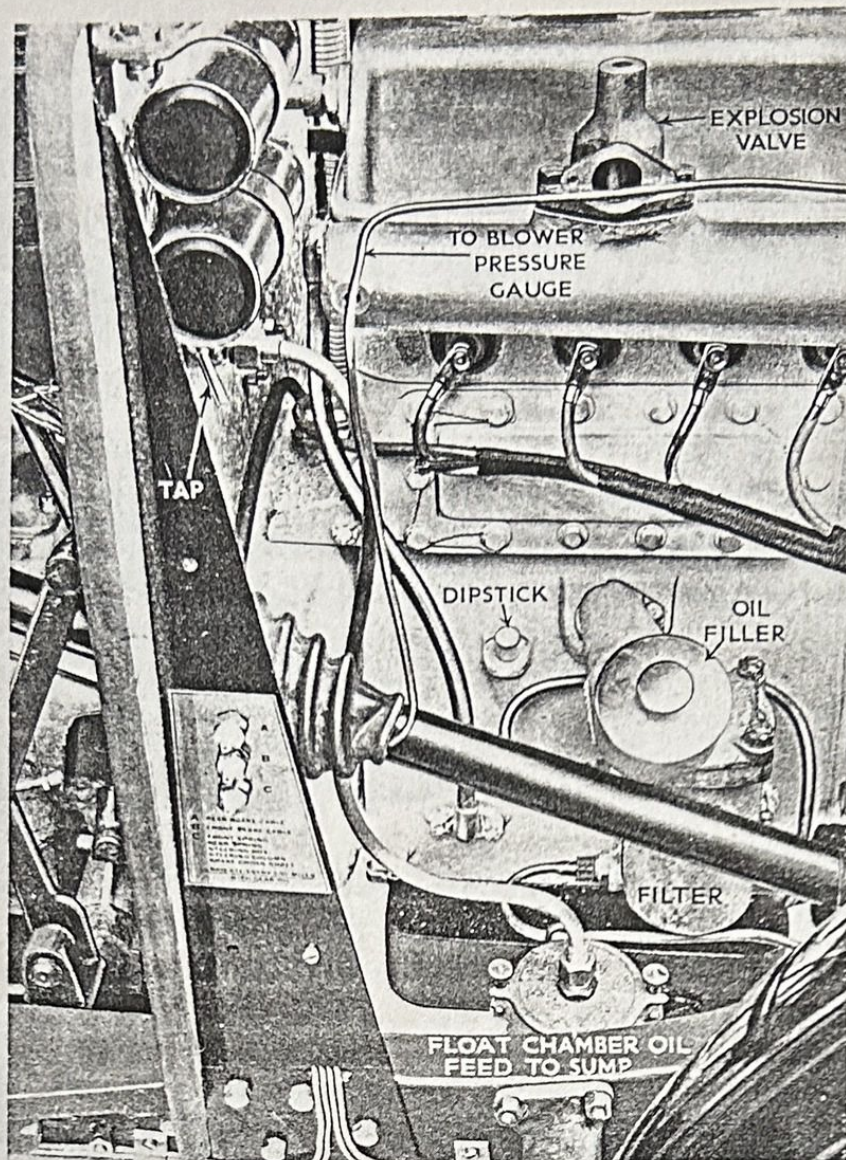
Illustration No. 6.—Side view of engine, showing explosion valve, oil feed float-chamber and position of dipstick and filler and filter.
